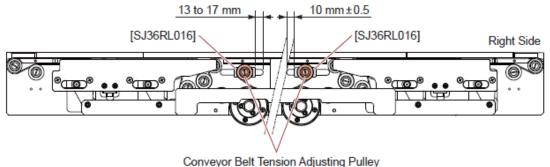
Adjust the Conveyor Belt Tension (BF-3Di-Z1)
